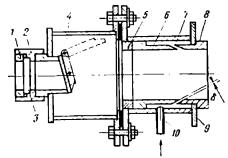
Viewhole of a gas-tight boiler 1—pressure nut; 2—glass holder; J—port glass; 4—hinged flap; 5—check nut; 6—nut to control the gap 0; 7—annular slit for air; 8—come end-plece; 9—Irame; 10—pressurized air in
